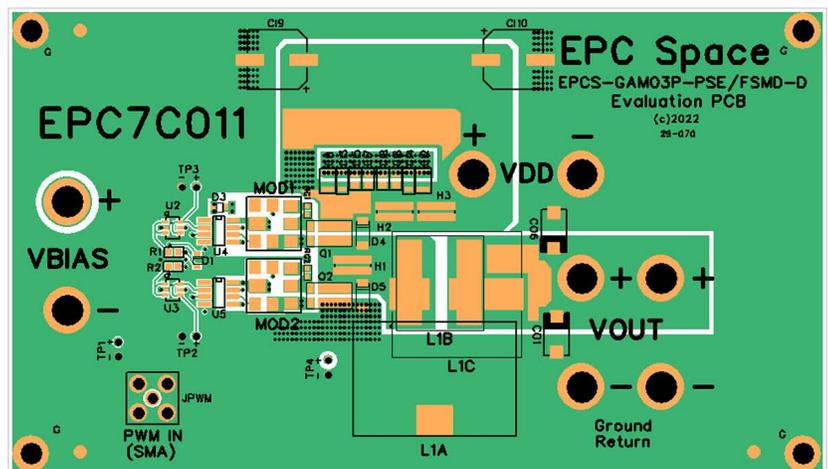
EPC7C011 Evaluation Board PCB Layout Example
